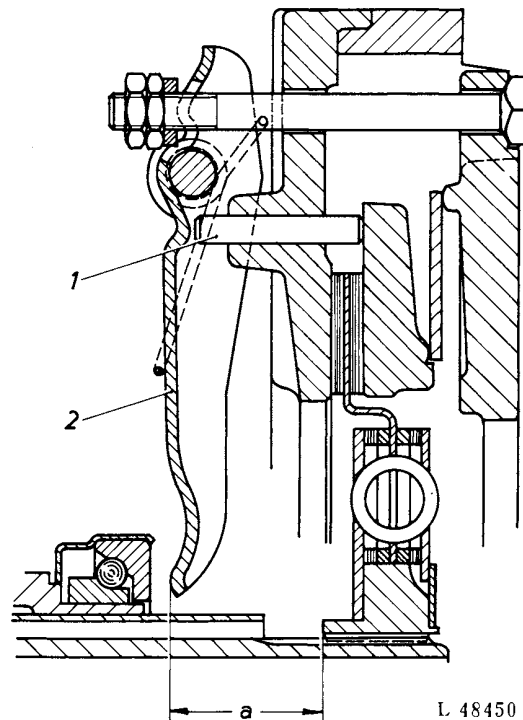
Dimension for Adjusting Engine Dual-Stage Clutch
